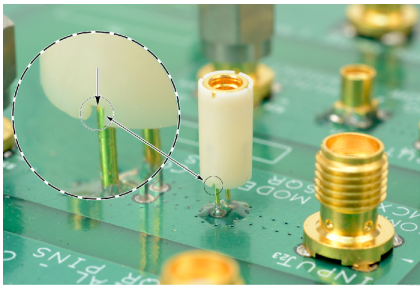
Lining up the MMCX-to-0.062-inch (1.57 mm) adapter on the circuit board
